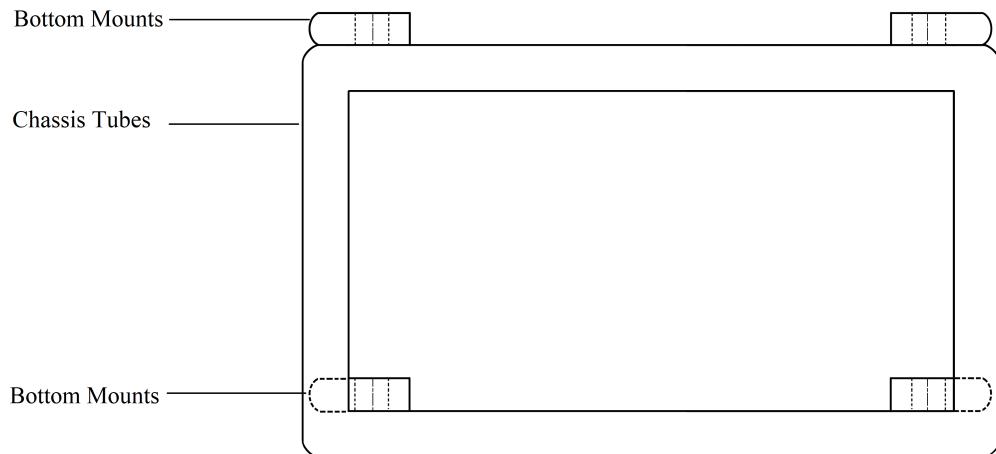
Front View of Bottom Mounts Welded onto Chassis
